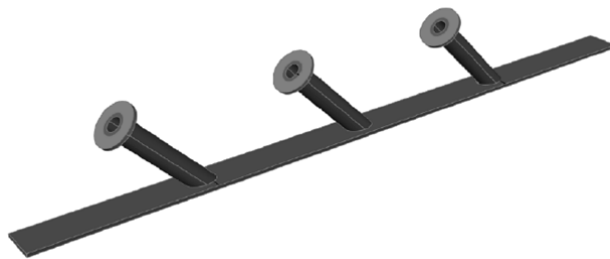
steel plate with welded pipes containing the screws (used in the tests of Paper [1])
